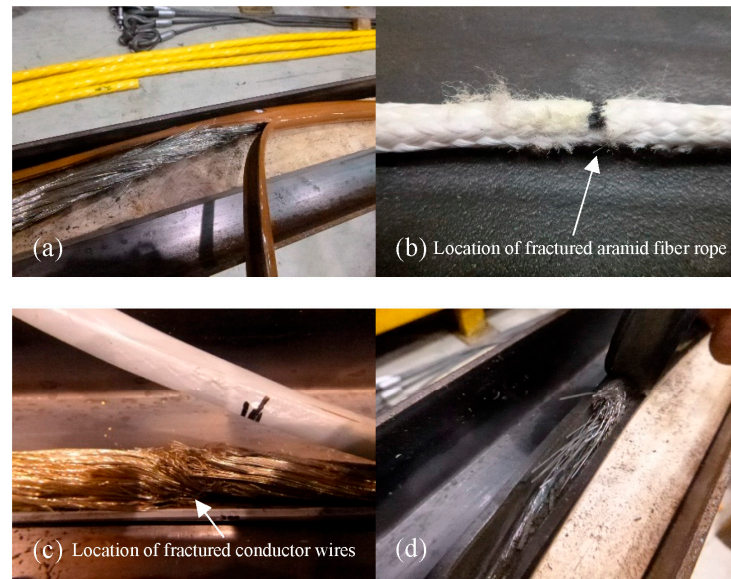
shows photographs of a dissected 3.6 kV cable. The outer sheath has been removed in the photographs. An ocular inspection of the cable's components was performed to search for potential damage in the insulation material. No visible damage was found in either the 1 kV or 3.6 kV cables. The fiber optic sensors and aramid fiber ropes were intact. Subsequently, all the conductors were dissected, and their insulation materials were removed. The wires of all the conductors were intact along the length of the cable except for the region wherein there was contact between the cable and the preformed templates (hereafter referred to as the “contact zone”). In this region, all the conductors had several conductor wire failures and wear debris due to combined fretting and fatigue damage leading to fracture. We concluded that this wear–fretting–fatigue failure was related to the fatigue test procedure and setup and is unlikely to occur in real installations of this type of cable considering its intended use. Therefore, an alternative and more suitable fatigue test setup should be developed and used in future studies.
